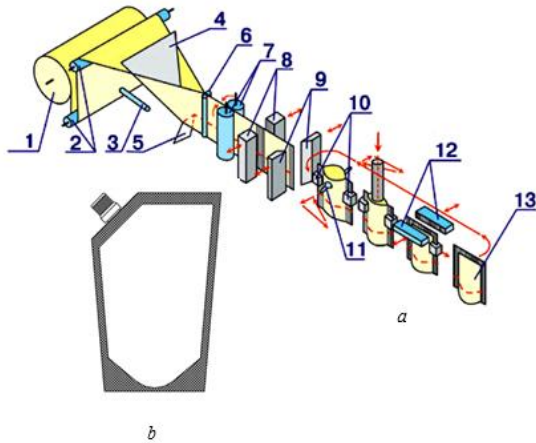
Technological scheme of packing paste in "doy-pack" bags (a) and a doypack package with cork (b): 1 – laminate roll, 2 – laminate unwinding, 3 – perforator, 4 – pipe forming, 5 – photo sensor, 6,7 – rolls, 8 – longitudinal welding, 9 – cutting, 10 – opening of the package, the 11 cork welding mechanism, 12 – sealing of the package (for packs with a cork, between the cutting mechanism 9 and the mechanism for opening the package 10, the mechanism for cutting off the corner of the pack 9-a, the cork feeding mechanism 9-b and are not shown)
